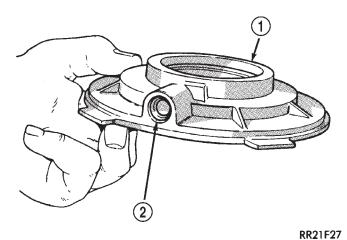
Pickup Tube O-Ring Location 1 – OIL PUMP
